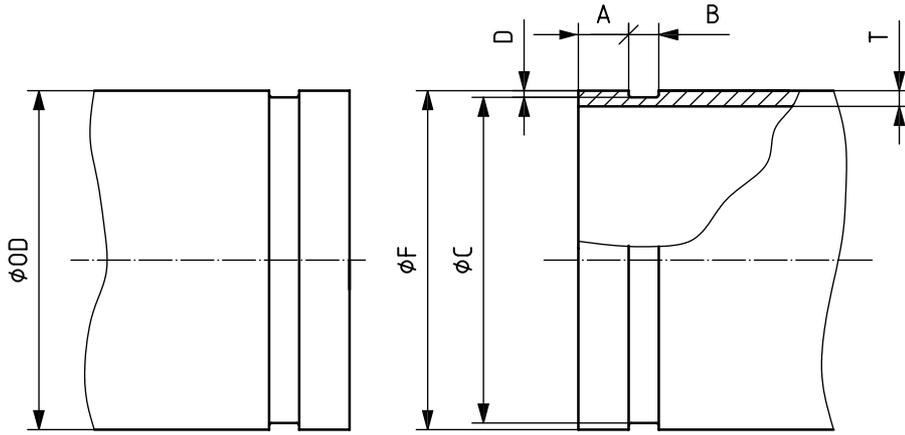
Roll grooved-end dimensional reference points from Table 1
